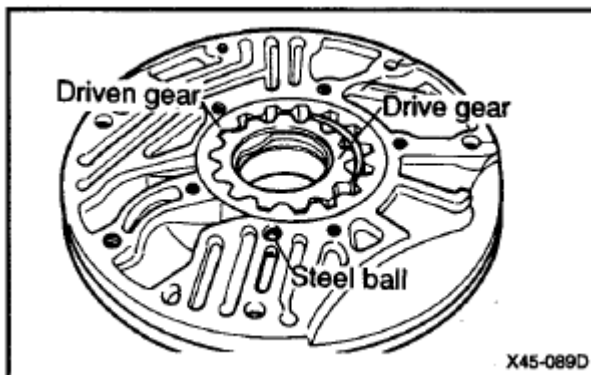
Identifying Oil Pump Drive, Driven Gear, & Steel Ball
